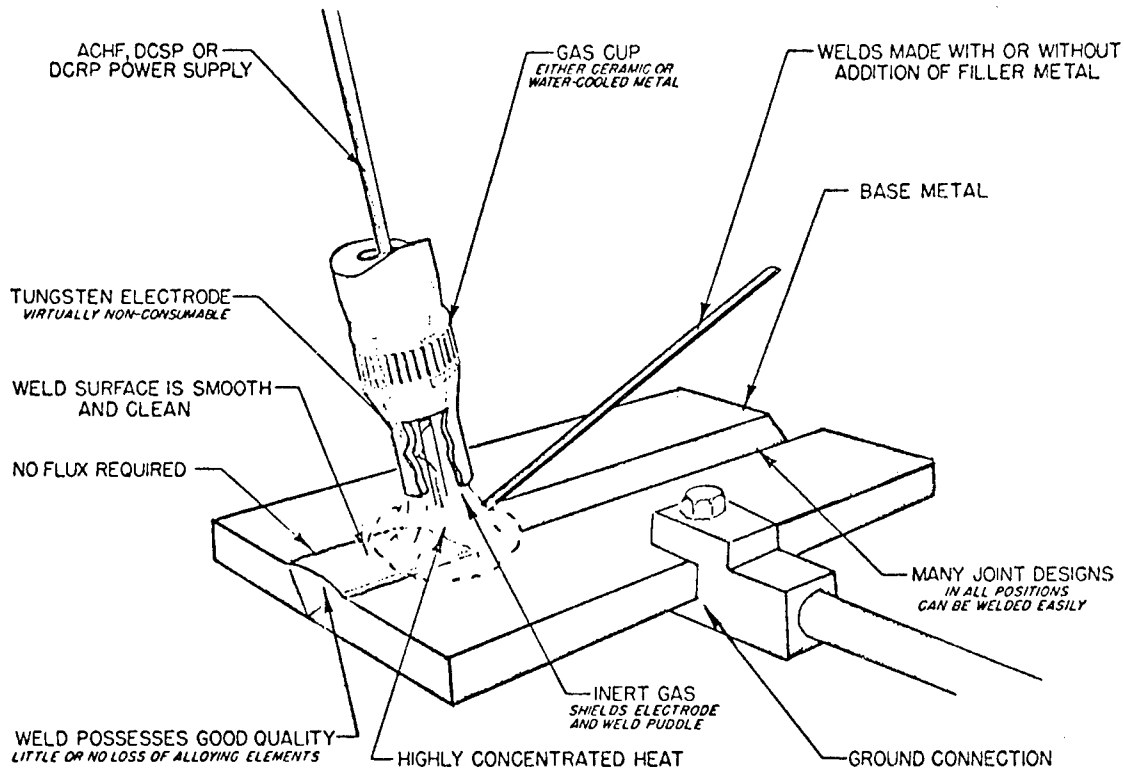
Welding Zone in Inert Gas Shielded Tungsten Arc Welding
